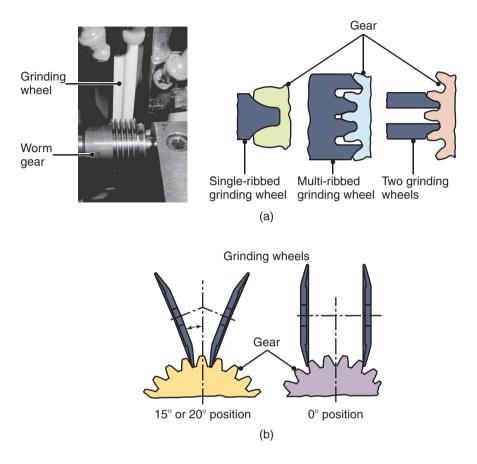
Finishing gears by grinding: (a) form grinding with shaped grinding wheels; (b) grinding by generating, using two wheels.
